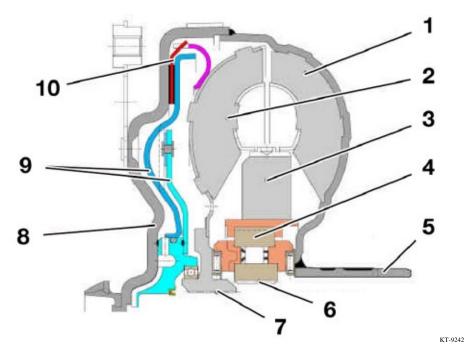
GA6HP26Z, torque converter and converter lockup clutch
